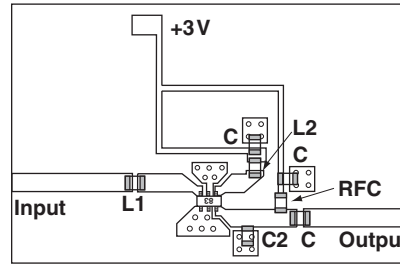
Completed 2.5 GHz Amplifier Assembly.
